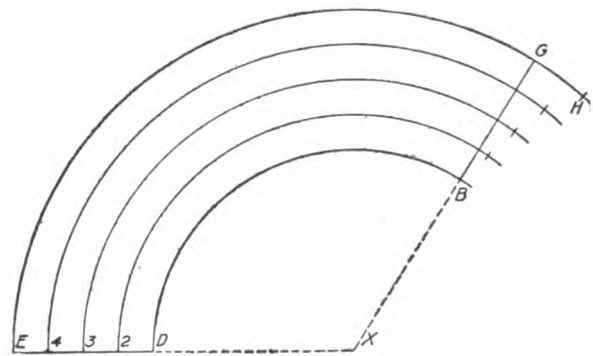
Pattern for Blank Using Radius Obtained in Fig. 82
